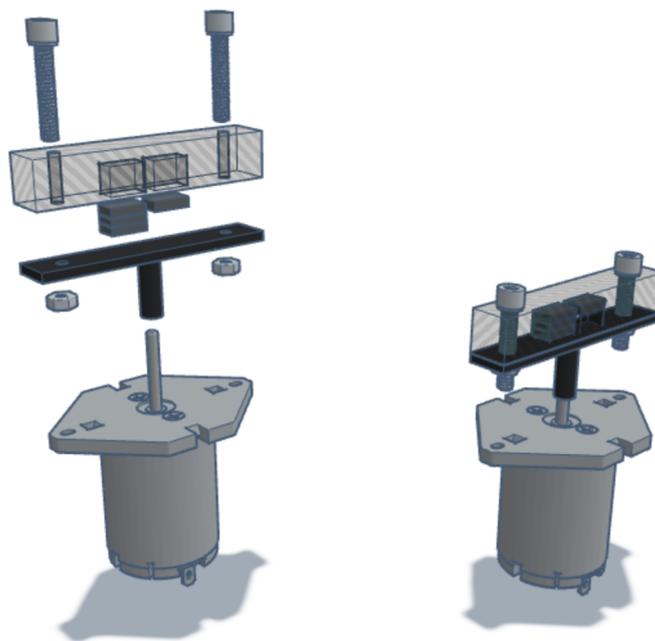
Exploded and assembled view of the magnetic stirrer: A 12V DC motor is connected to a 3D printed mounting. The mounting contains two columns of magnetic bars, with one column having one magnetic bar, and the other having three magnetic bars. Finally, the mounting are assembled via two sets of M3 bolts and nuts. All the 3D printed parts are printed using PLA materials.
